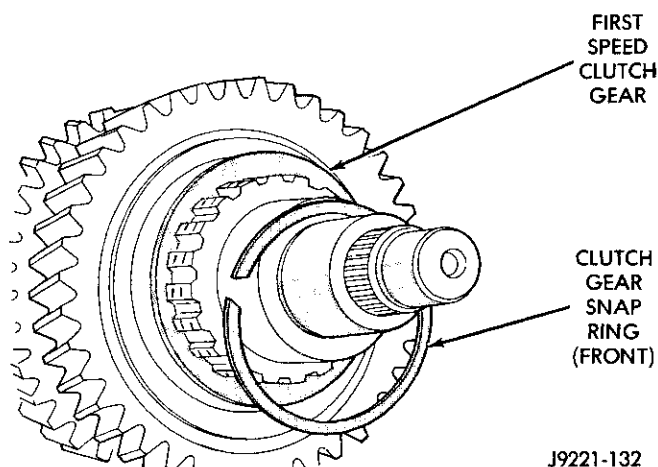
First Speed Clutch Gear Front Snap Ring Removal
